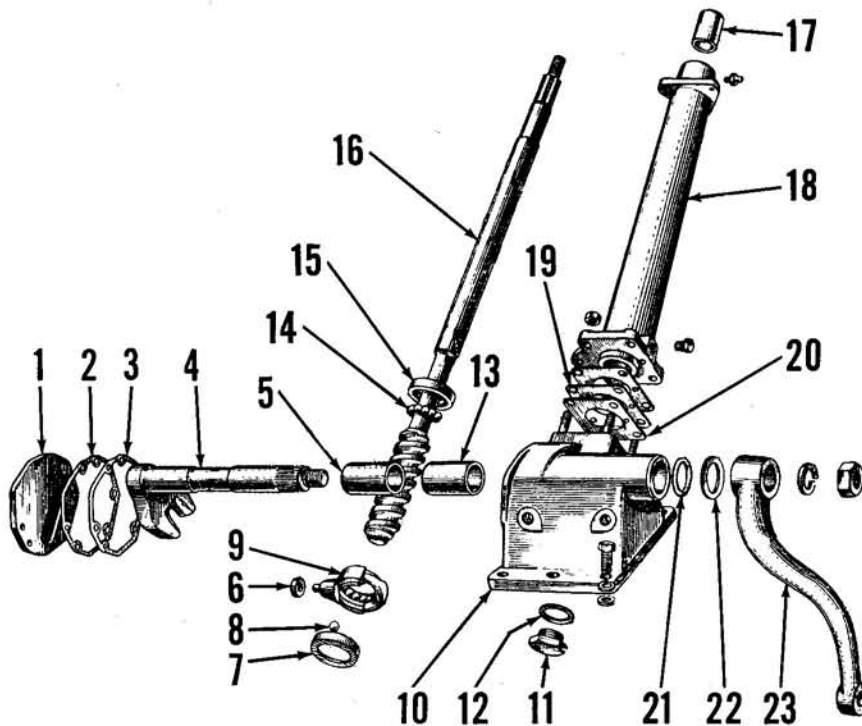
Exploded view of typical steering gear assembly for adjustable front axle models. Tricycle steering gear is same as that shown except that a different drag link is used. Steering column (18) for "FMD" models does not have instrument panel support and different wormshaft (16) is required. Late production oil seal (21) does not require retaining ring (22).
